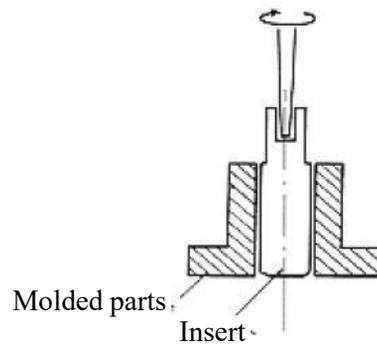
Insert Molded Product Shape and Insert Holding Force Measurement Method
